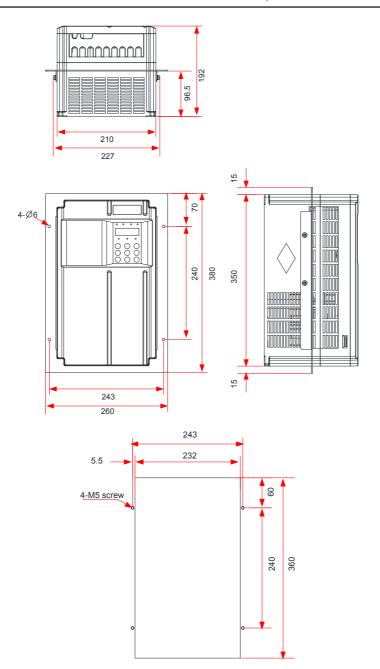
Dimensions of through hole mounting bracket and hole of MD500ET18.5G(B)(-T) to MD500ET22G(B)(-T)
